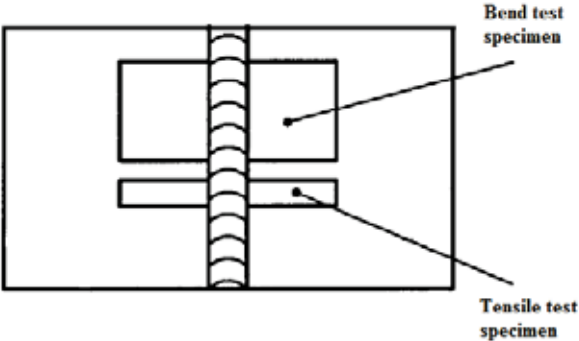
, Schematic sketch of how the bend test specimen and tensile test specimen are located.
